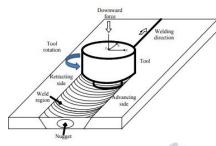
The friction stir welding process is shown schematically.
